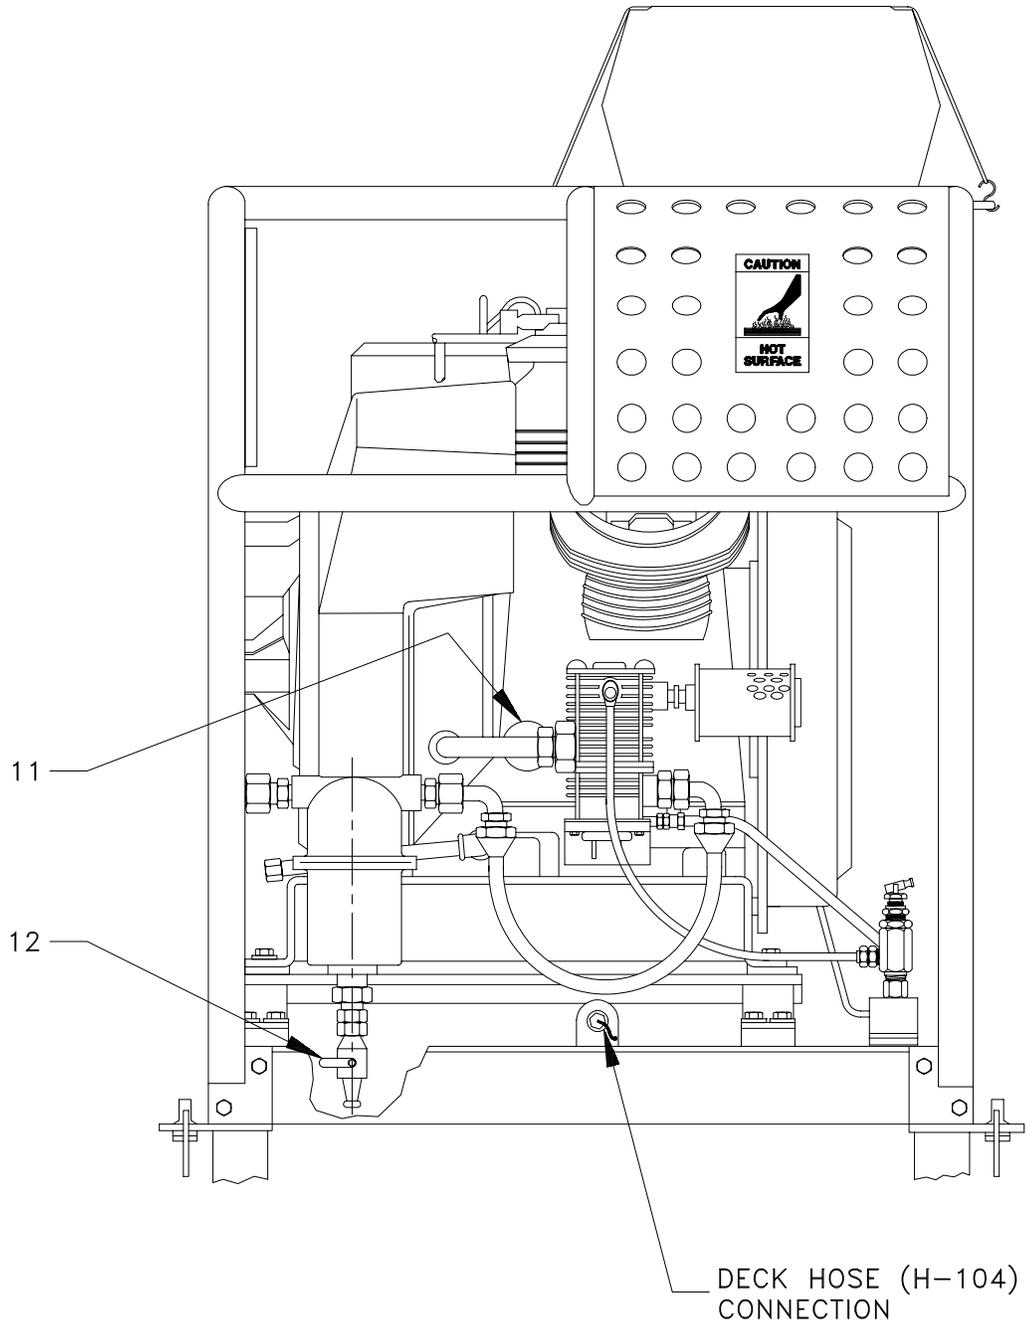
Diesel-Compressor Assembly (Right Side View)
